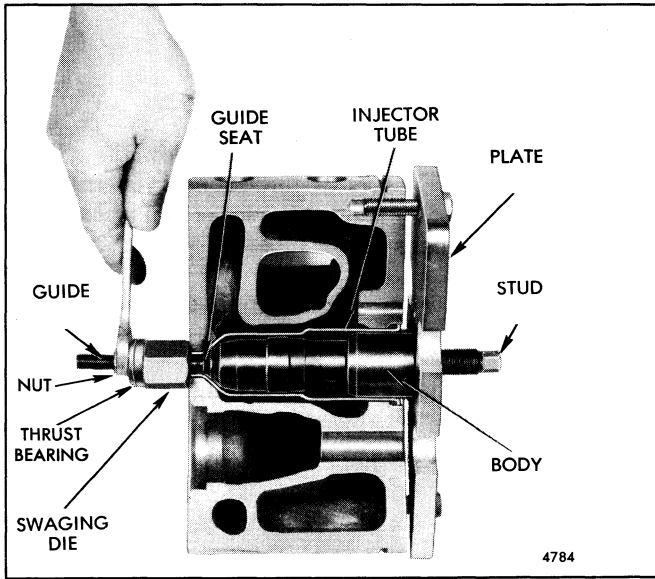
Swaging Injector Tube with Tool Set J 22342-01
